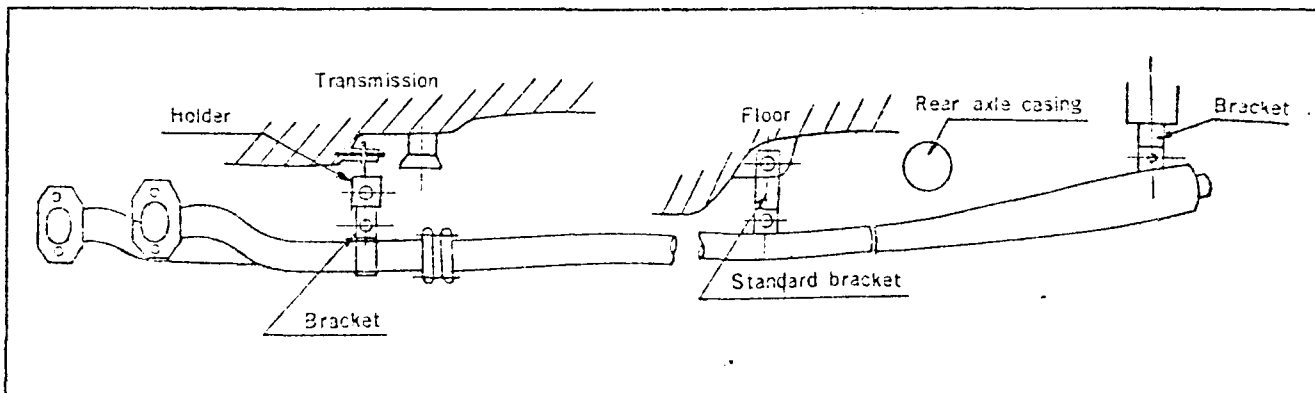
Installing Exhaust Pipe and Exhaust Manifold
